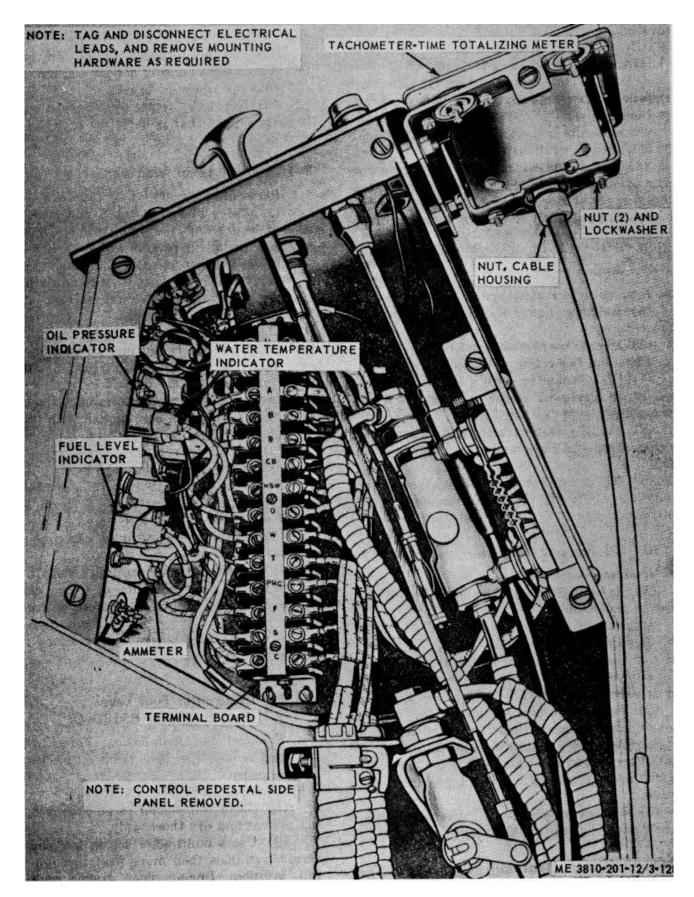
Tachometer-time totalizing meter, oil pressure indicator, fuel lever indicator, and ammeter, removal and installation.
